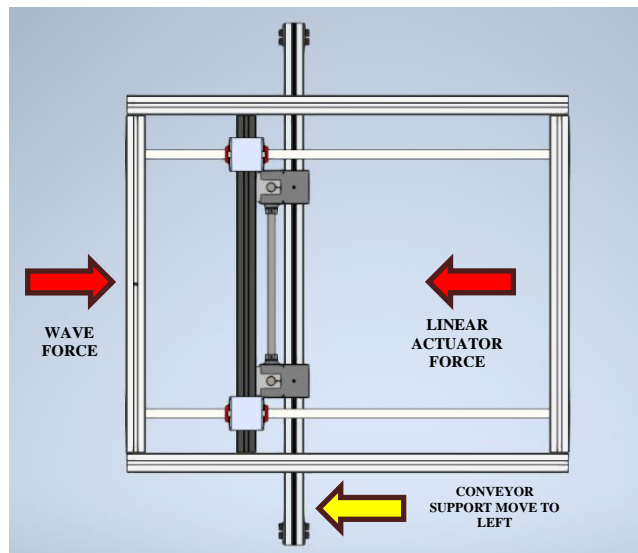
Top View Suspension System 2099 A Mechanism (Before)
